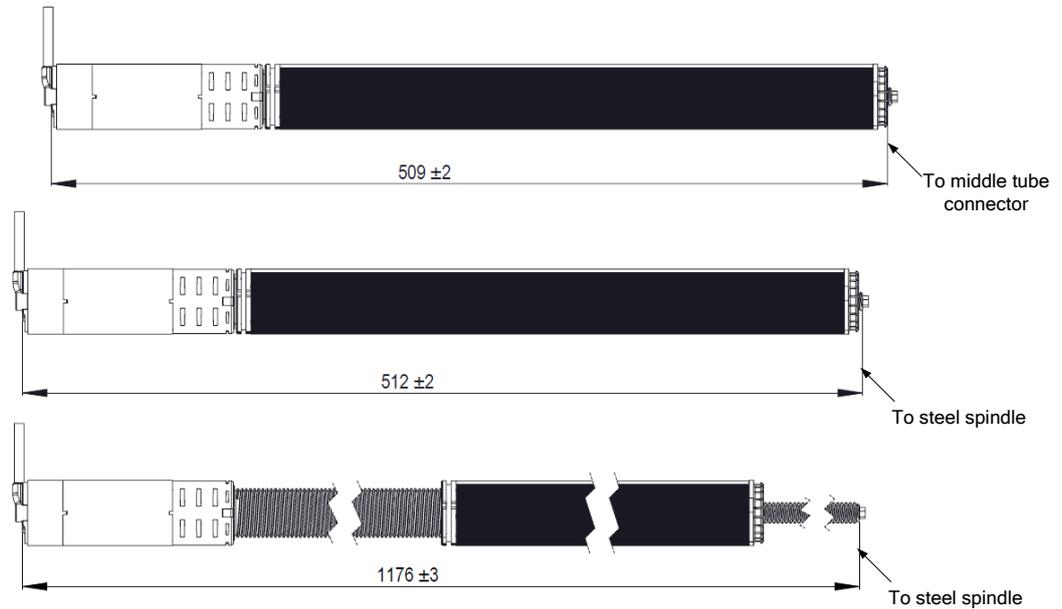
Overall dimensions of SLIMdrive-660S actuator in retracted and extended position
